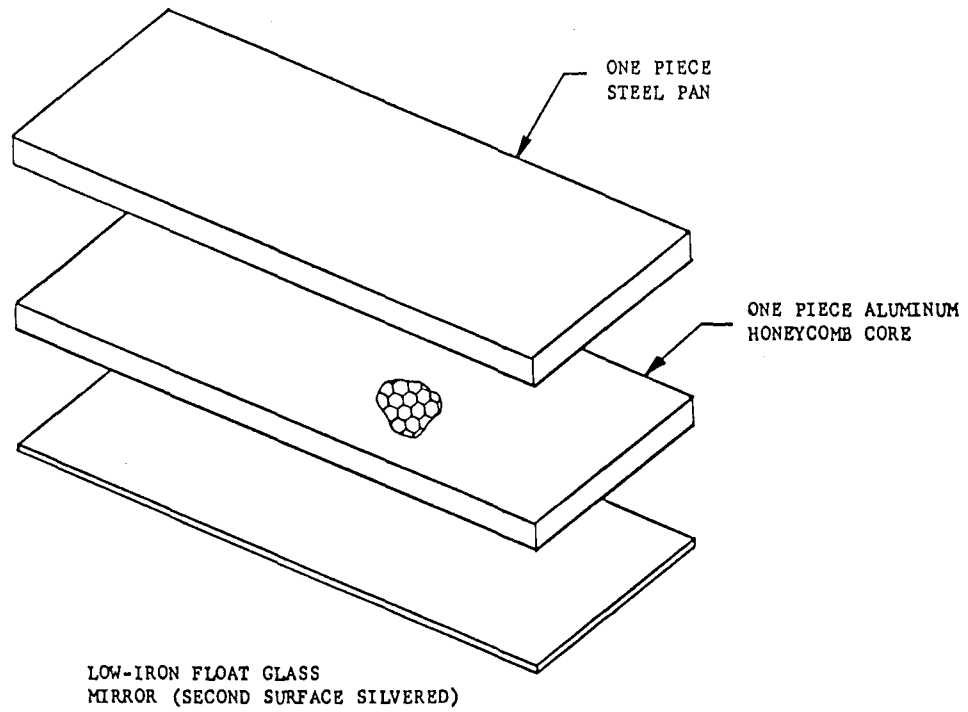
Exploded View of Honeycomb-Core Mirror Assembly
